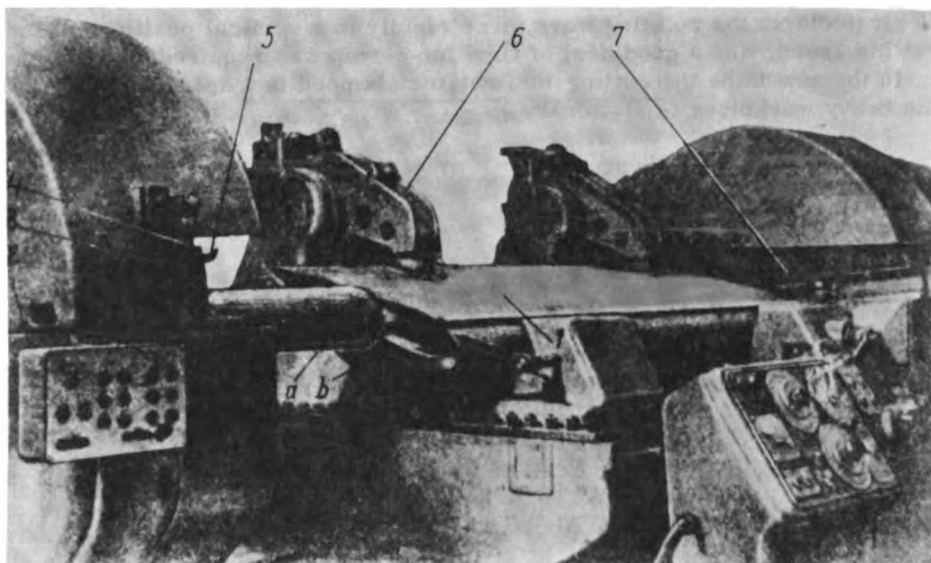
Lathe for machining guide-vane pivots:
